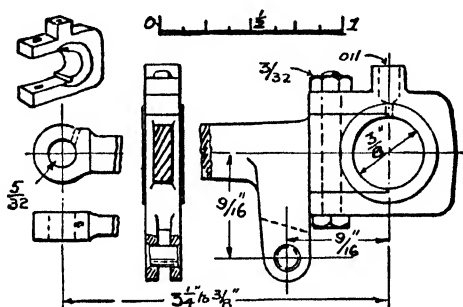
2½-in. Gauge Model Strap-ended Rod with Valve Gear Lug.
